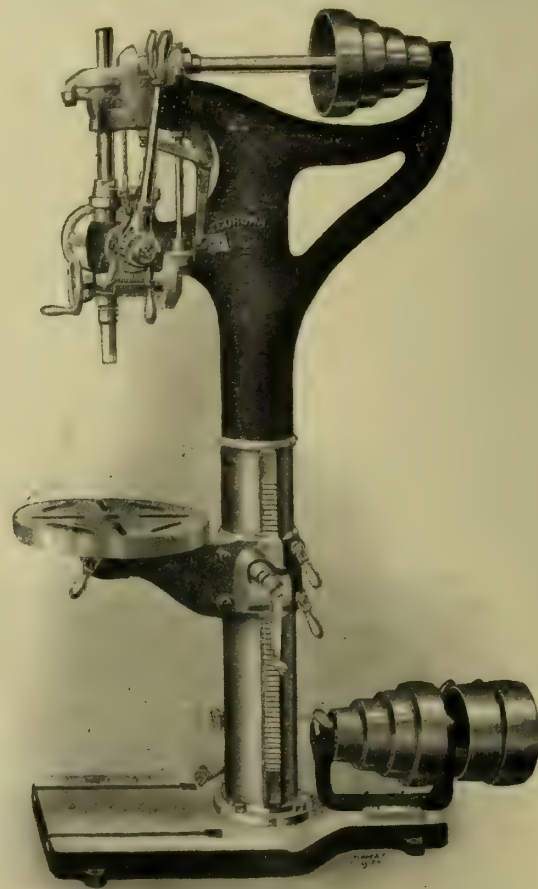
"CORONA" 20in. UPRIGHT DRILLING MACHINE. MESSRS. FREDERICK POLLARD & CO., LTD., LEICESTER.
